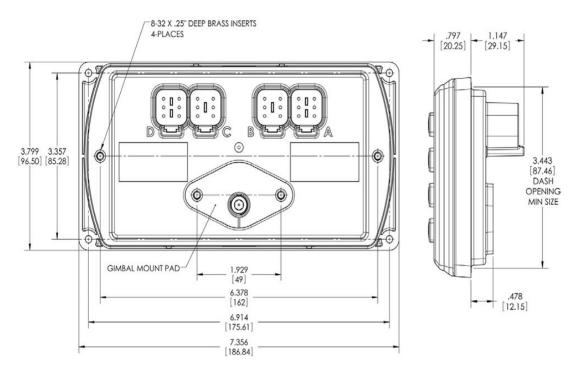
Dimensions of the wheelhouse repeater [in inches & mm]
